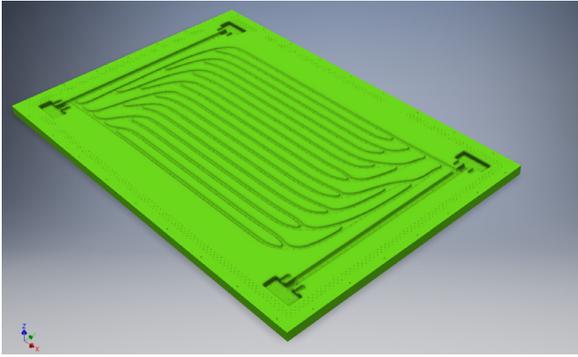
CAD drawing of mold for membrane vacuum deep-drawing process (1683 mm x 1040 mm).
